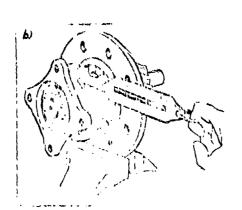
Method of checking axial clearance in the hearings of the final drive bevel pinion shaft:
